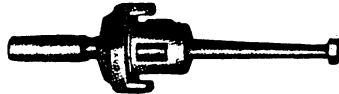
STANDARD ROLLER TUBE EXPANDER
